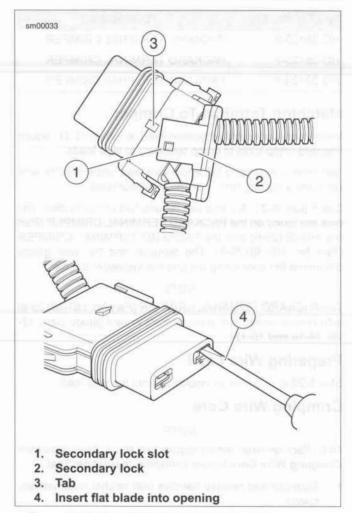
Delphi 800 Metri-Pack Sealed Main Fuse Housing: Remove Socket Terminals
